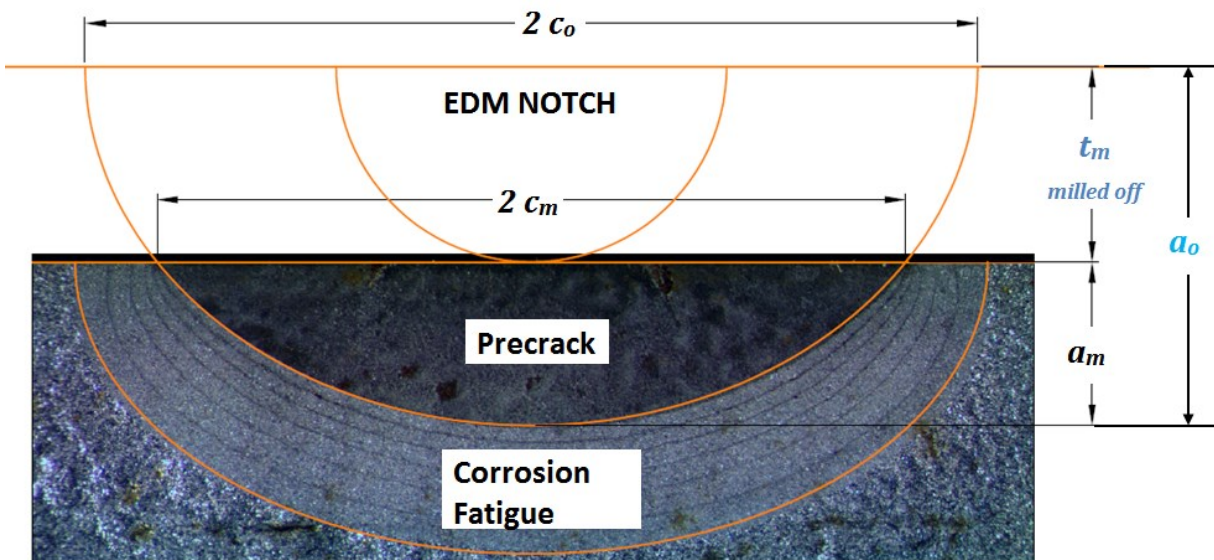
The cleaned fracture surface of a crack that has undergone precracking, milling, and then corrosion fatigue tests. The image is taken with a stereomicroscope. The precrack region is dark, and easily distinguishable from the corrosion fatigue region. Dimensions in black are directly measurable. Dimensions shown in blue are derived from other measurements.
